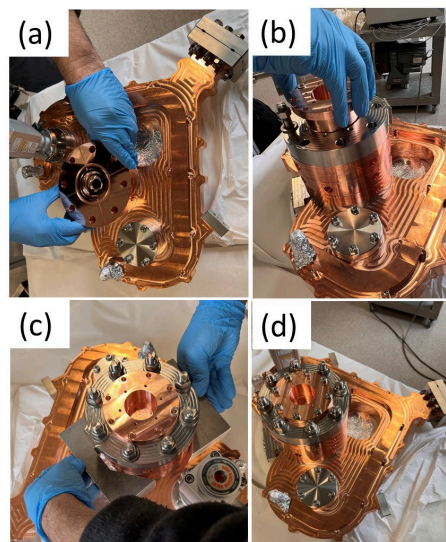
Pictures of The Gun Under Assembly: (A) Assembly of The Cells; (B) Cathode Insertion; (C) Cell Alignment Before the Final Clamping; (D) Vacuum Test;
